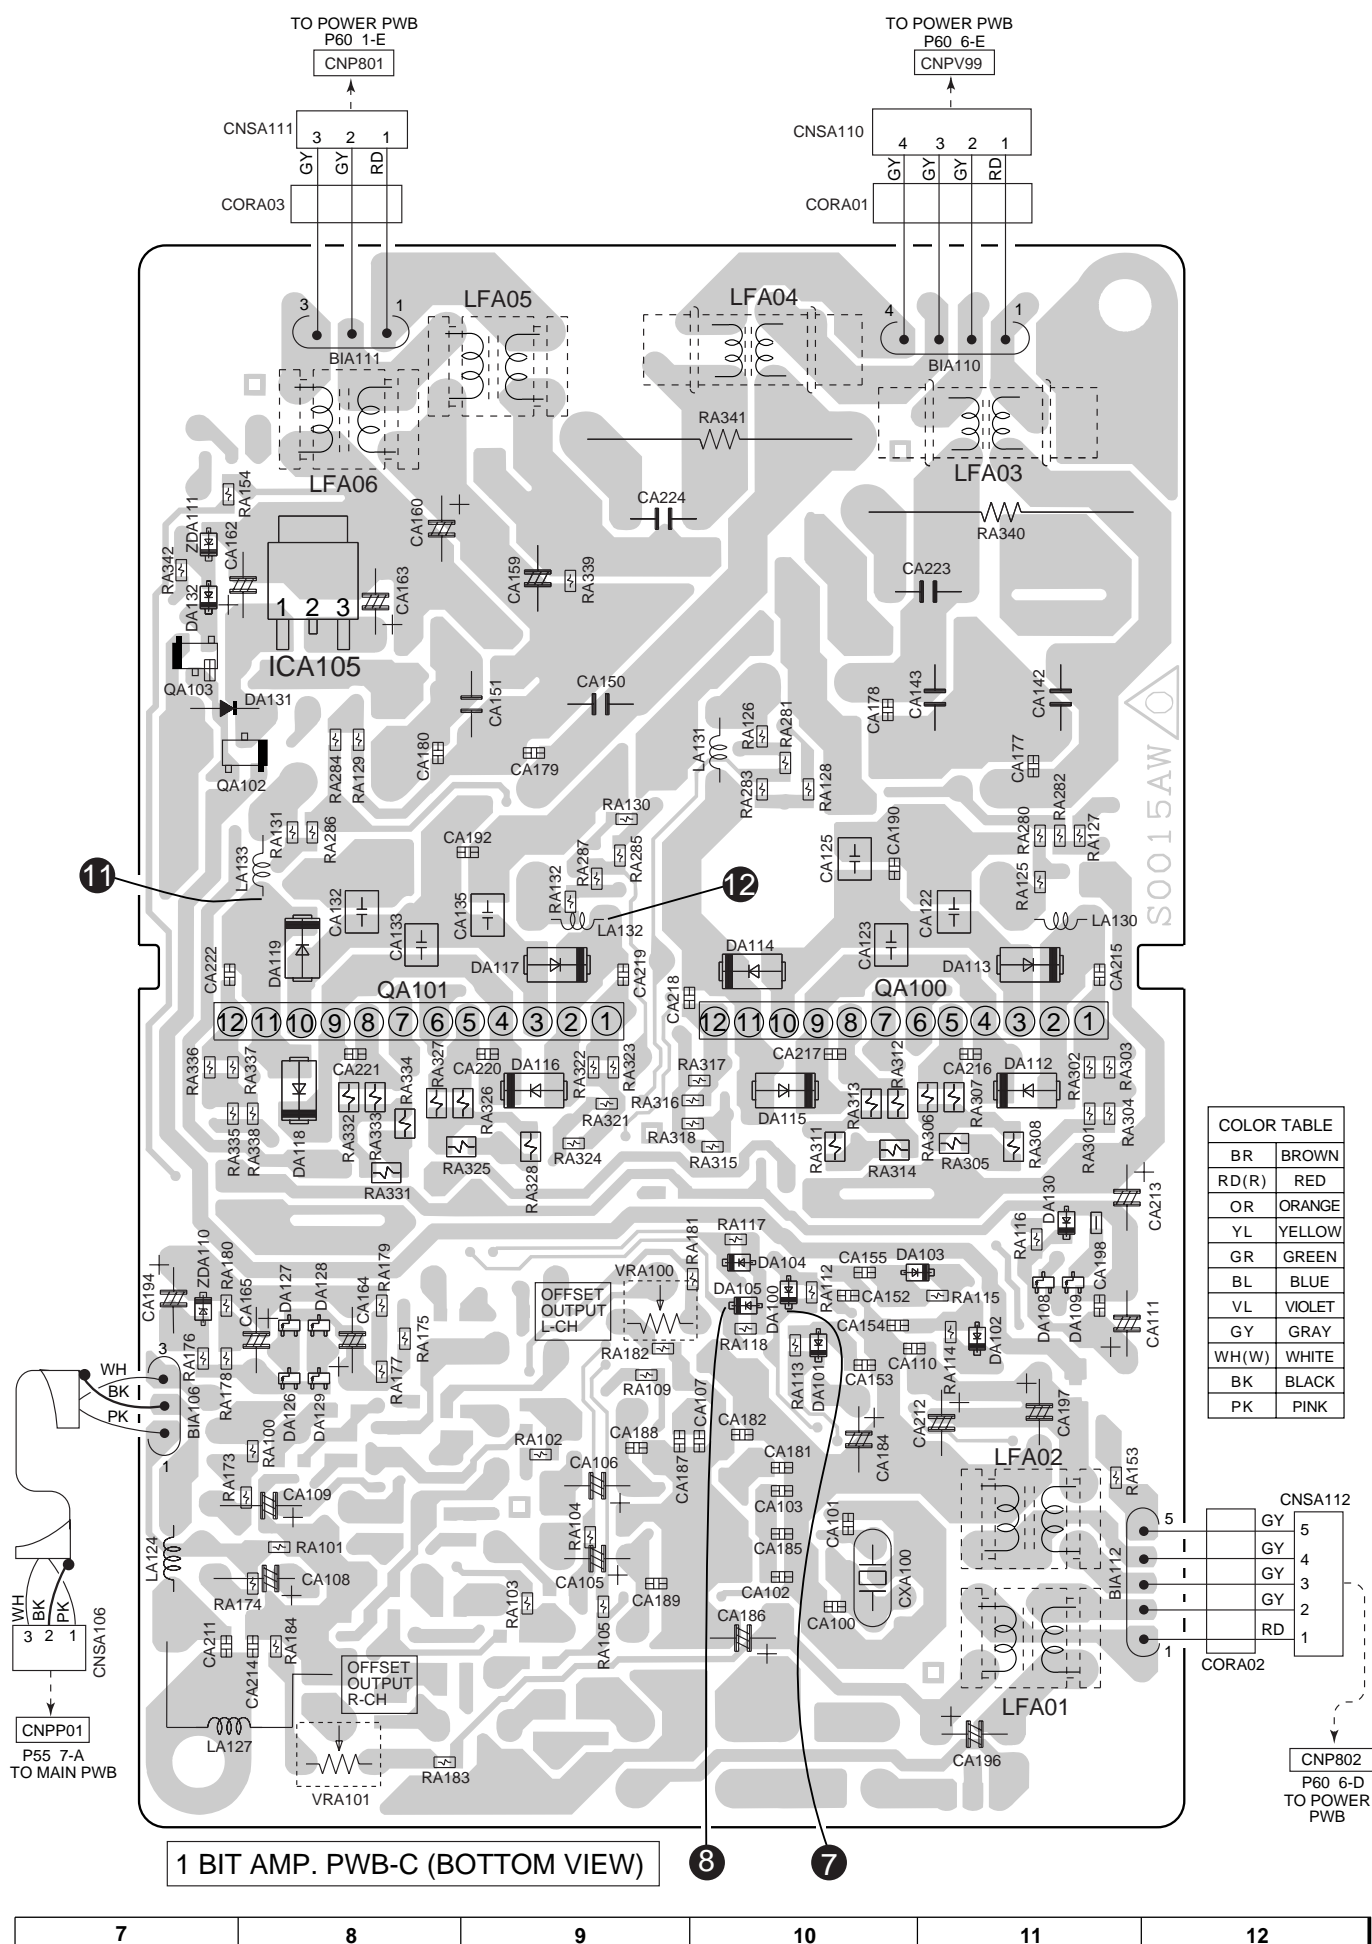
WIRING SIDE OF P.W.BOARD (10/13)
